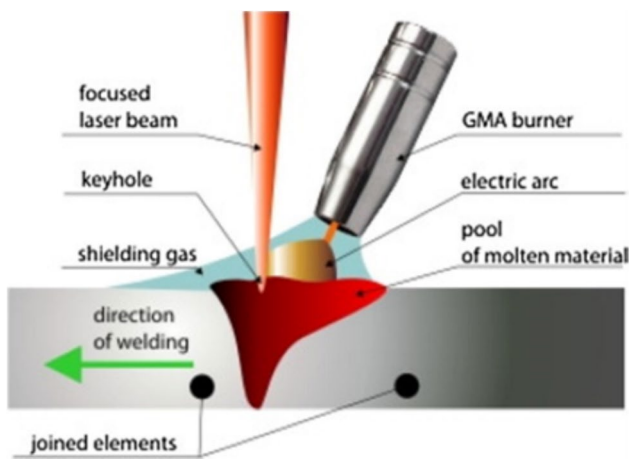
Illustration of the hybrid laser arc welding process [88]
